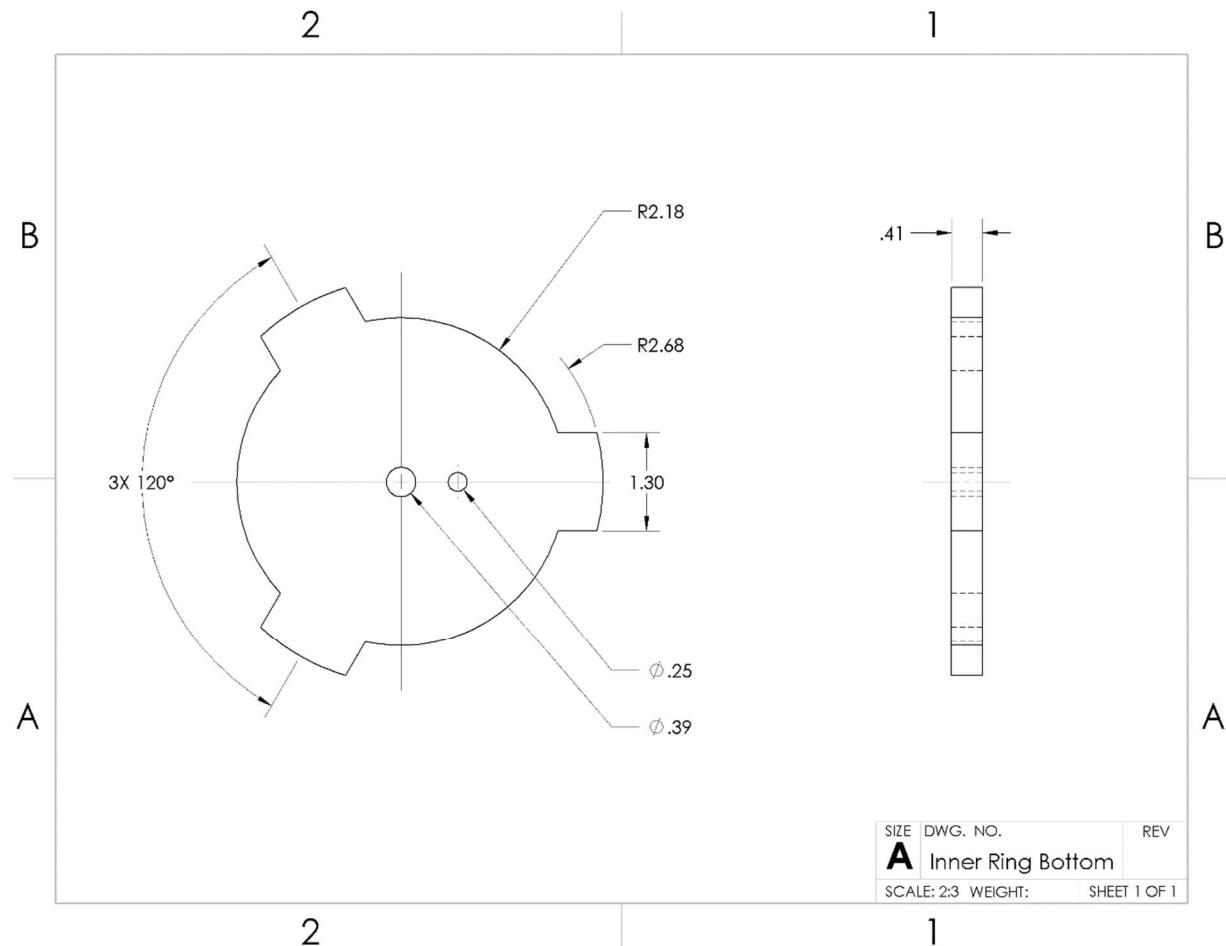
Locking Mechanism Inner Ring Bottom Drawing
